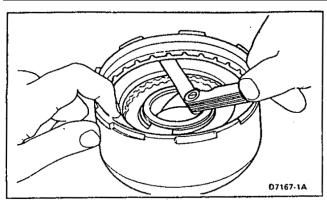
Checking Reverse-High Clutch Snap Ring Clearance
